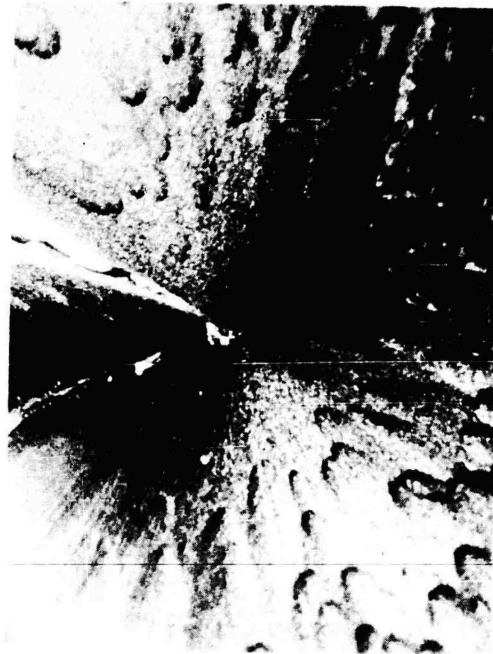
Parabolas in Fracture Surface of BC326
